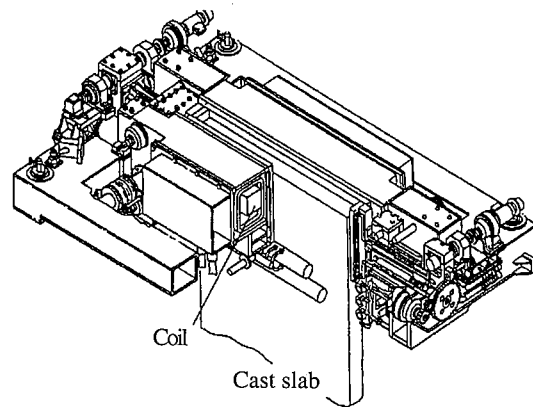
Schematic illustration of in-mold electromagnetic stirring (EMS) equipment
